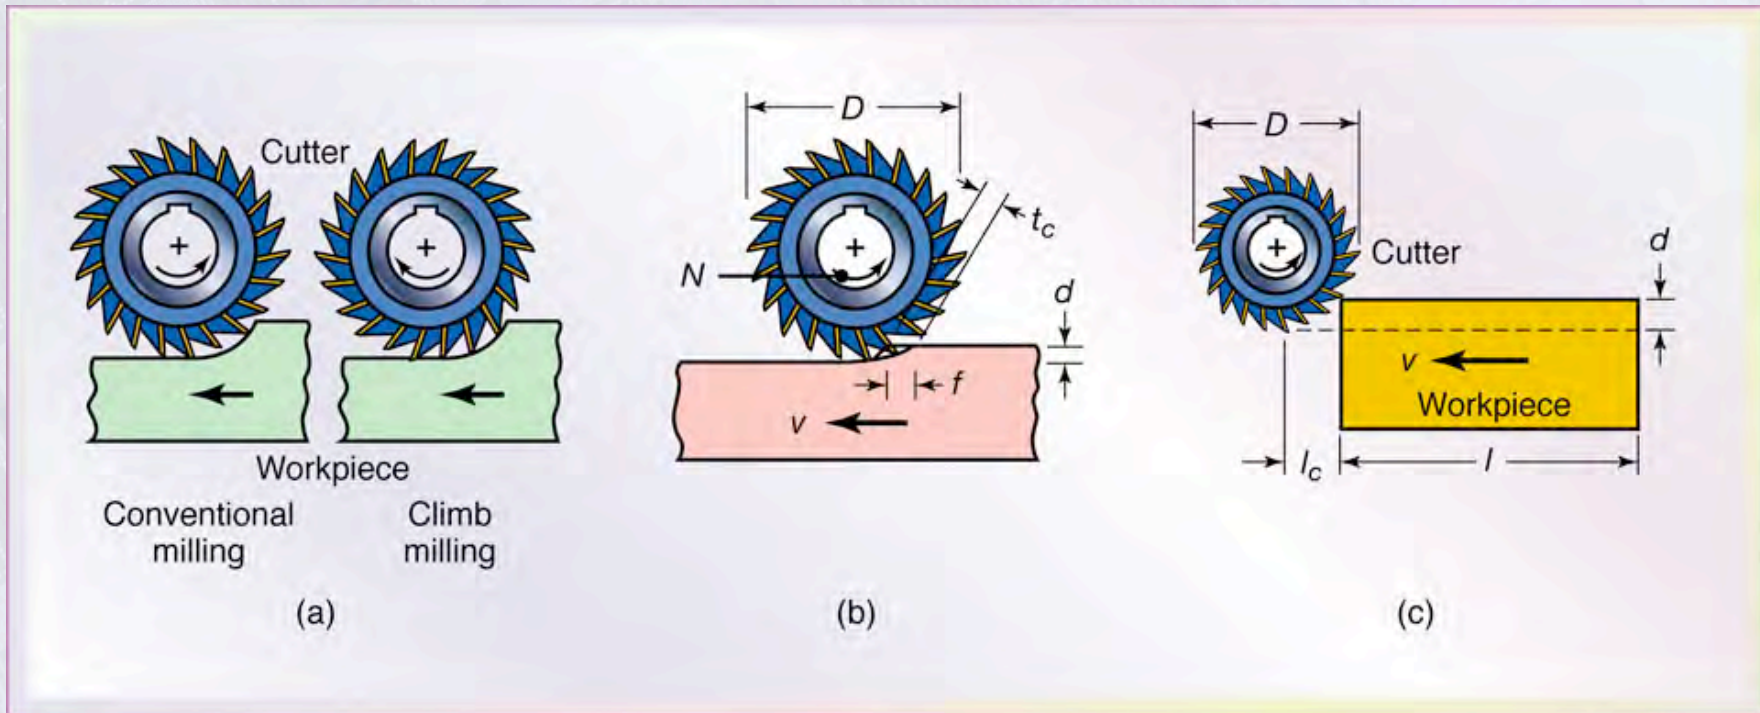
(a) Schematic illustration of conventional milling and climb milling. (b) lab-milling operation showing depth-of-cut, d ; feed per tooth, f ; chip depth-of-cut, t_c ; and workpiece speed, v . (c) Schematic illustration of cutter travel distance, l_c , to reach full depth-of-cut.
